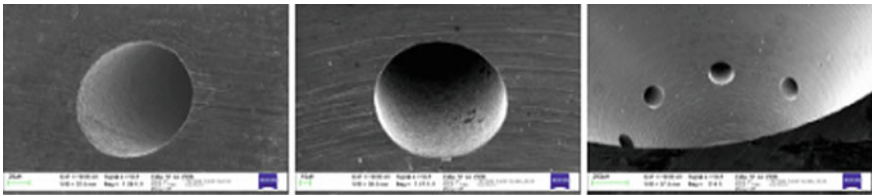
Left* Outer side of the spray hole (entrance of laser beam). *Middle* Inner side of spray hole (exit of laser beam). *Right* View inside the nozzle
